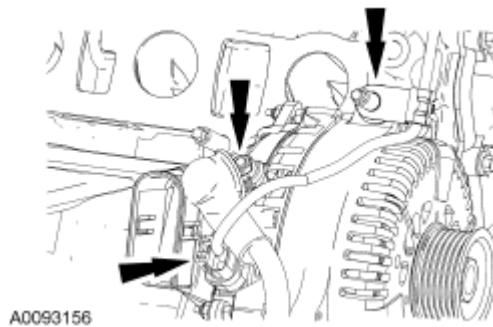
Locating Generator Electrical Connections And Wiring Harness Retainer
